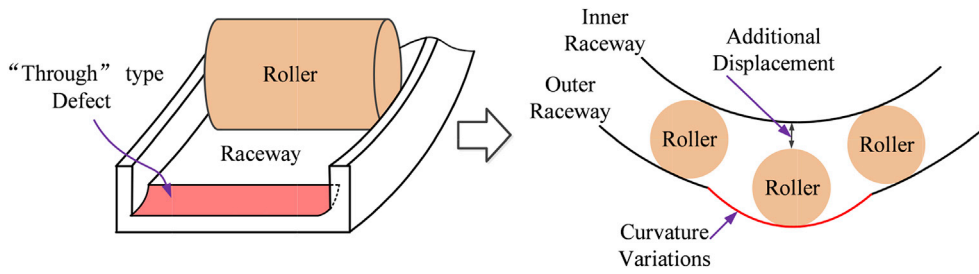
The model of "through" type defects of roller bearing.
